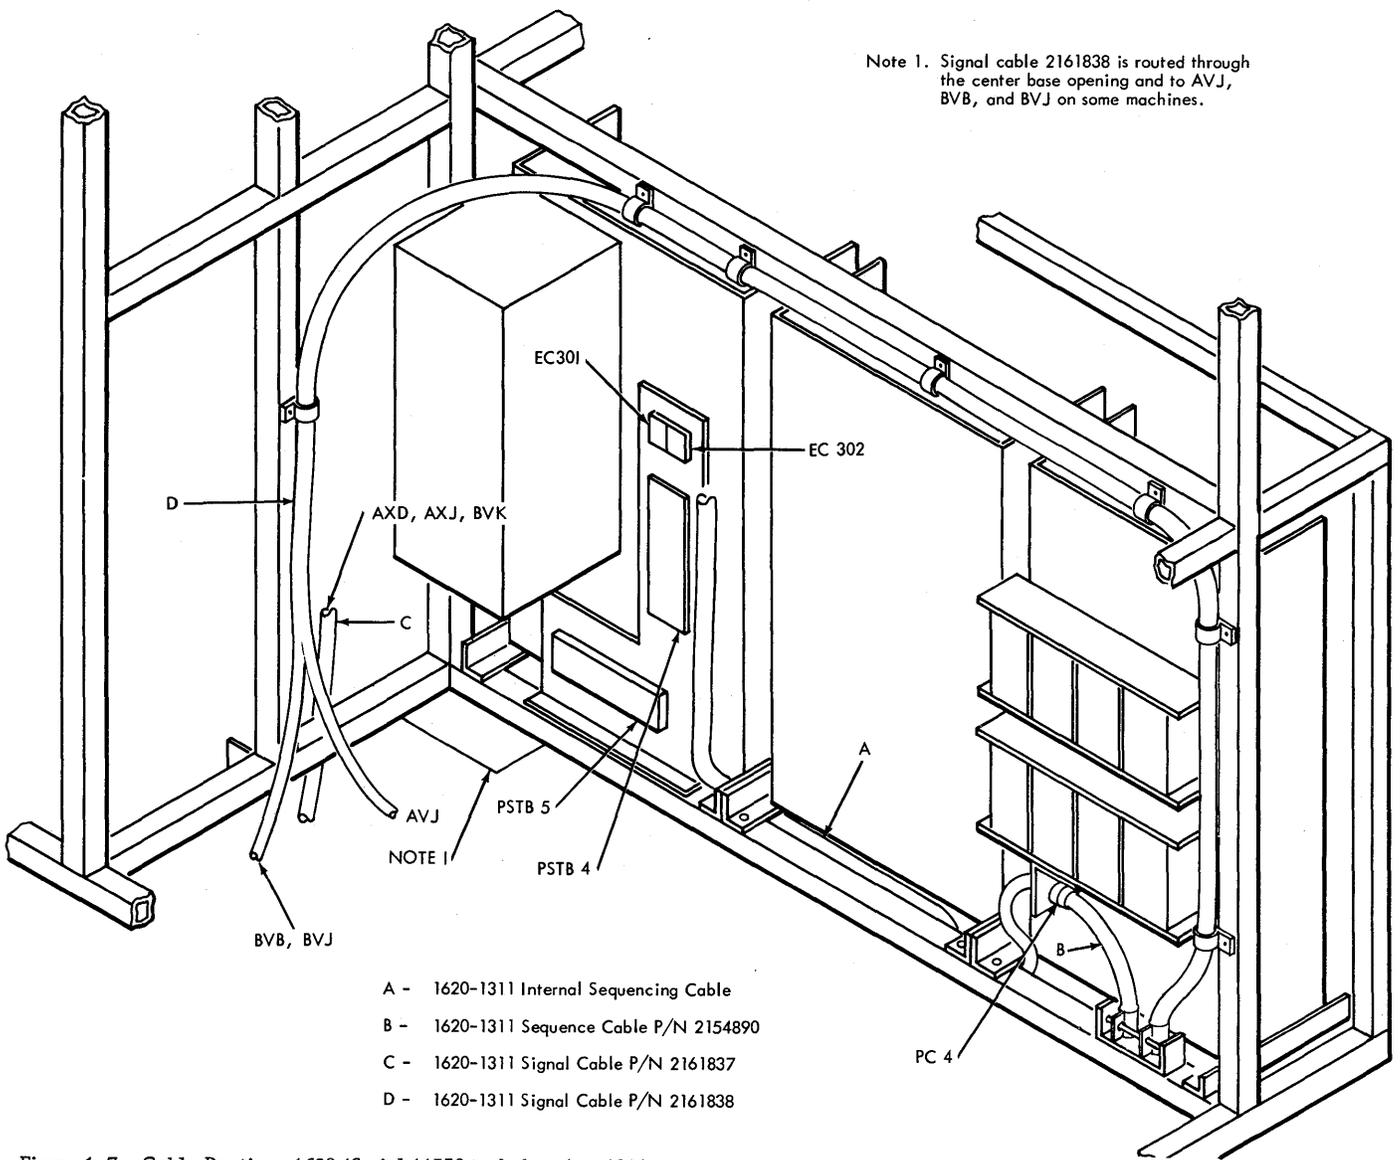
Cable Routing, 1620 (Serial 11550 and above) to 1311
